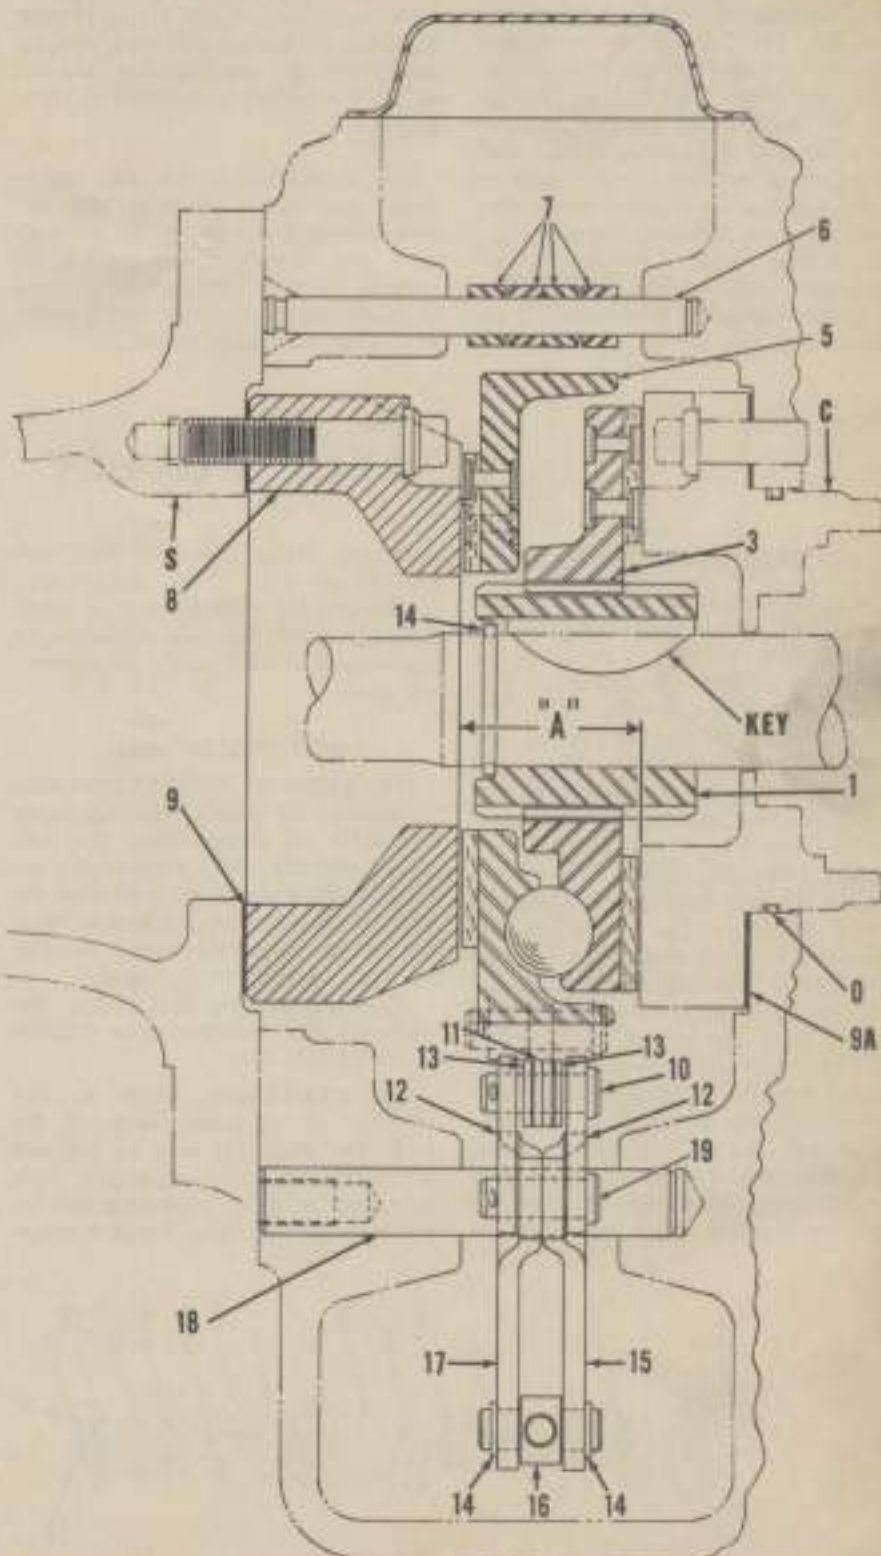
Cross-sectional view of the Bendix band/disc type brakes used on D-17 tractor Serial No. D17-42001 and up. Dimension "A" should be maintained at 2.034-2.044 inches. Refer to Fig. 137 for legend.
